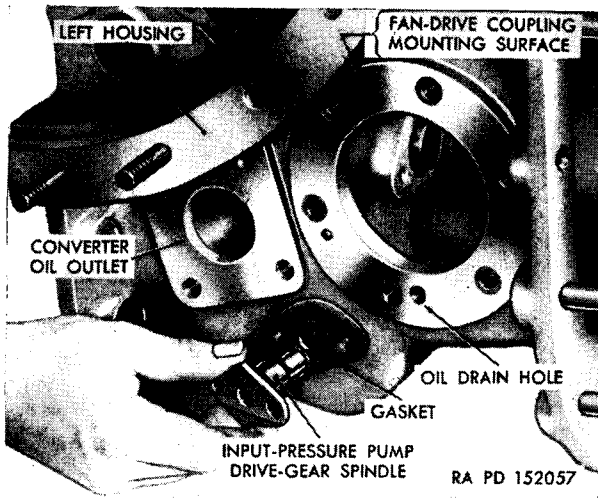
Installing input-pressure-pump-drive-gear spindle.
